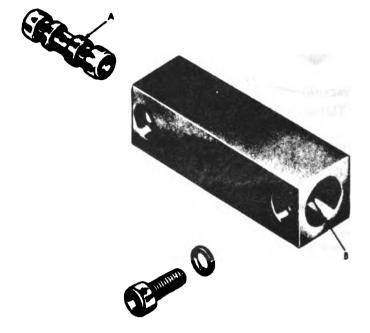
Manual elevation pump shuttle valve disassembly or assembly.
